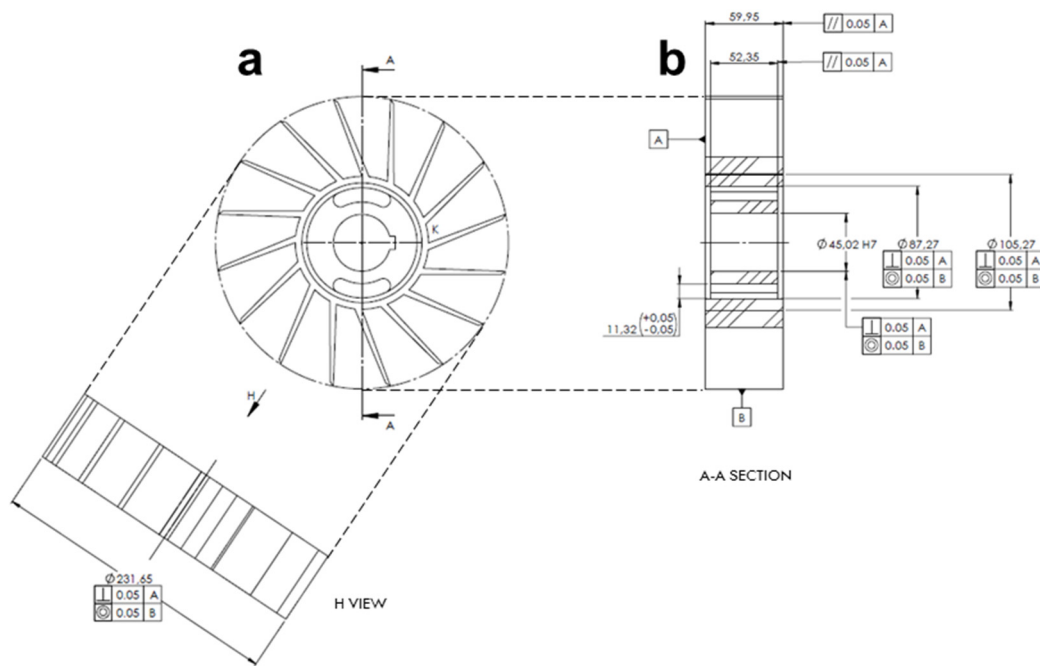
SLM impeller CAD file: a) front view and lateral (H) view; b) section view along the A-A axis.
